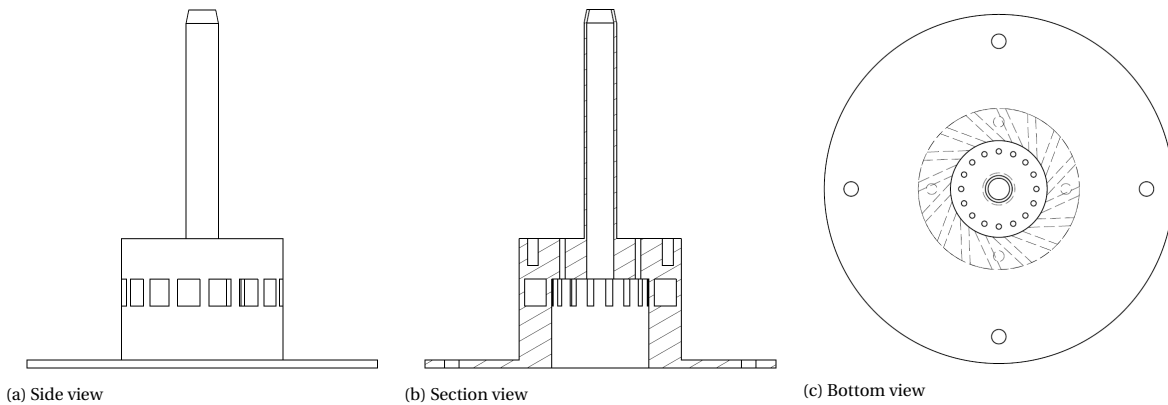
Technical drawings of radial swirl generator Sw=1.5
